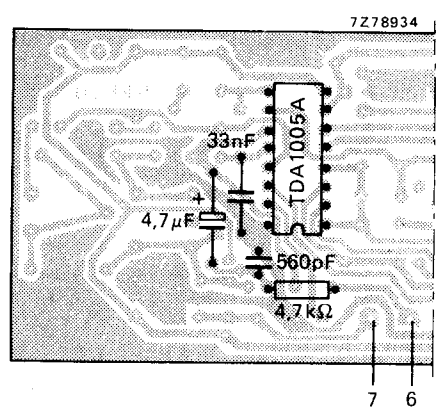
Printed-circuit board component side, showing component layout of Fig. 15.
